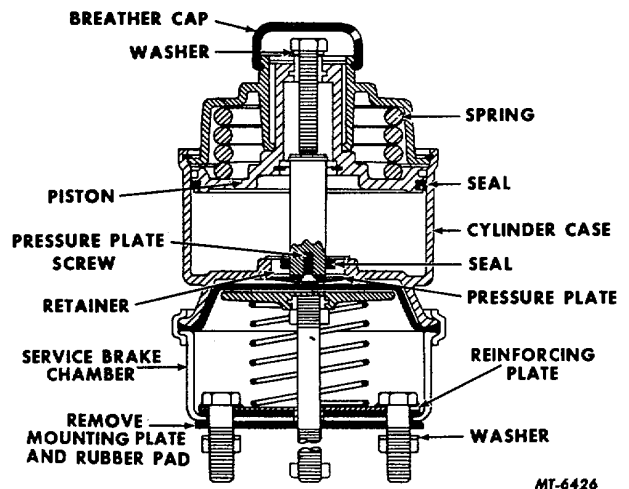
Early Model Parking Spring Brake Unit Having Mounting Plate and Rubber Pad
